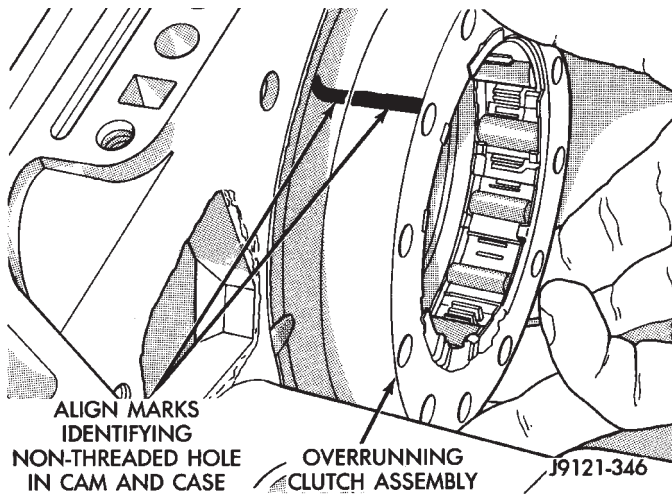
Location Of Non-Threaded Hole In Clutch Cam (42RH)
